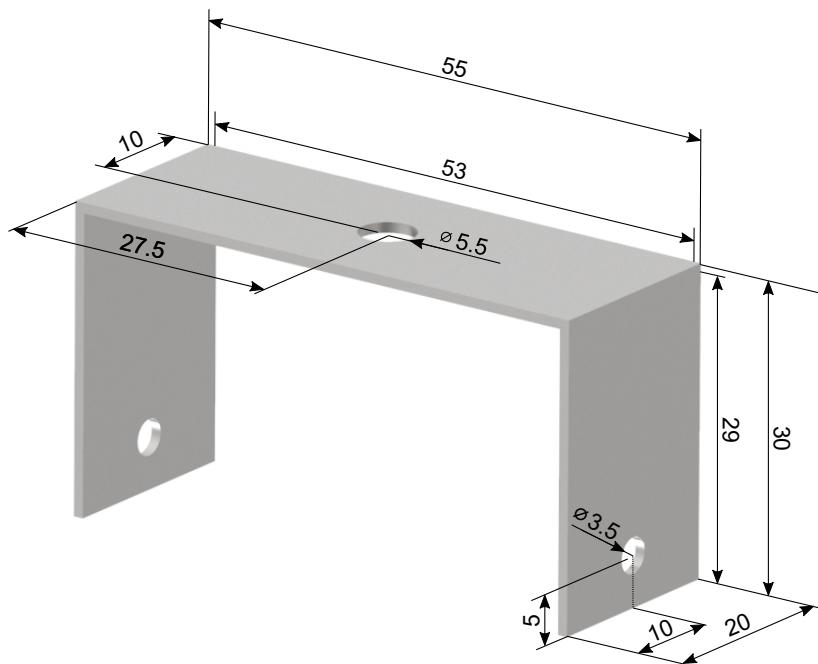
Steel sheet bent to a U-shape profile with bore placement instructions. All dimensions are in mm.
